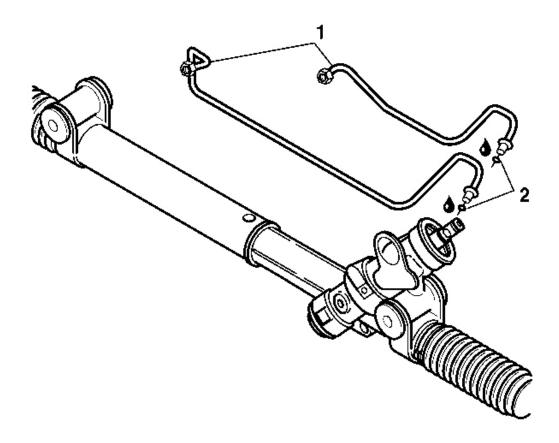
View Of Cylinder Line Assemblies & Gear Assembly Courtesy of GENERAL MOTORS CORP.
